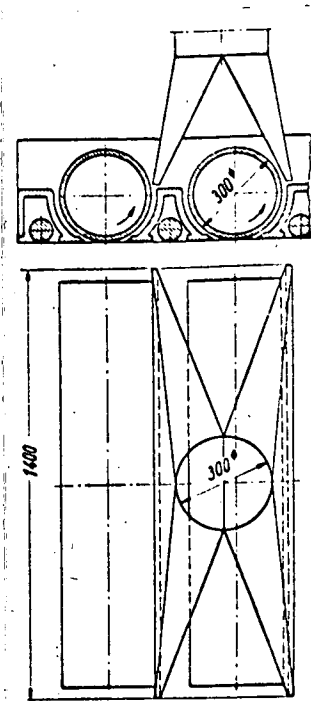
Collecting hood for large work widths, carried out to 2,600 mm.
